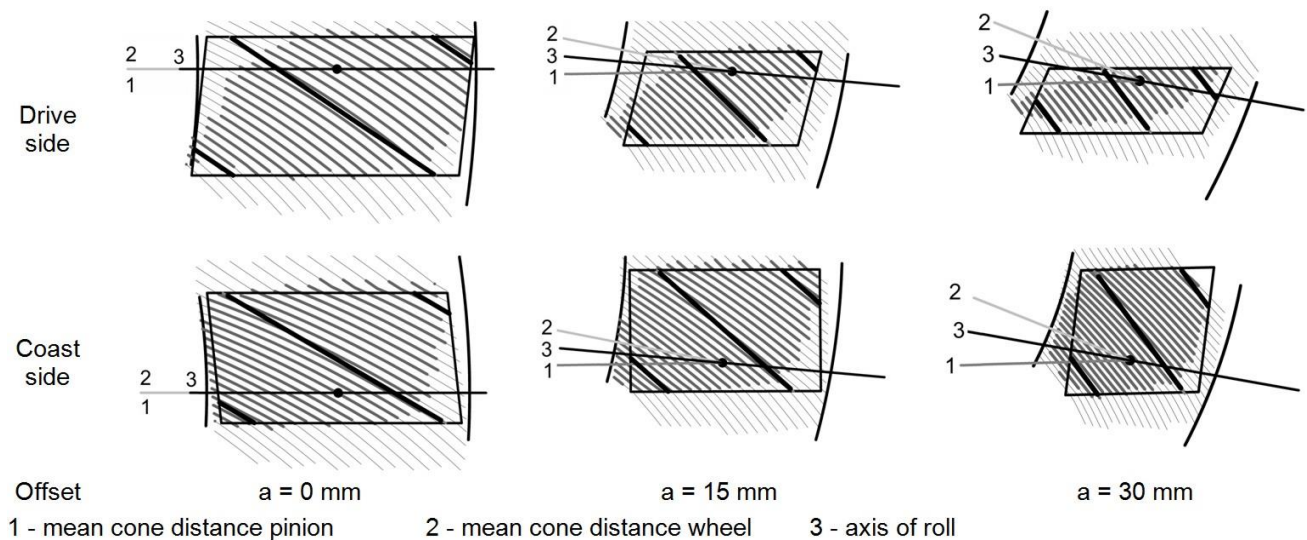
Exemplary zones of action of virtual cylindrical gear pairs and calculated contact patterns of the bevel gear sets in a projection parallel to the wheel axis
